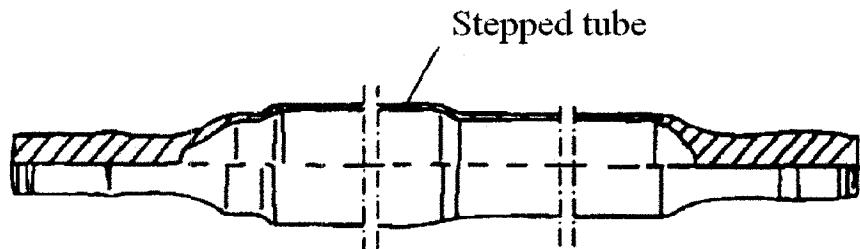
Both drive shafts ends welded to multi-stepped middle section (Thick/thin wall thickness). P. Amborn, H. Frielingsdorf, S.K. Ghosh and K. Greulich (1995) [2]
